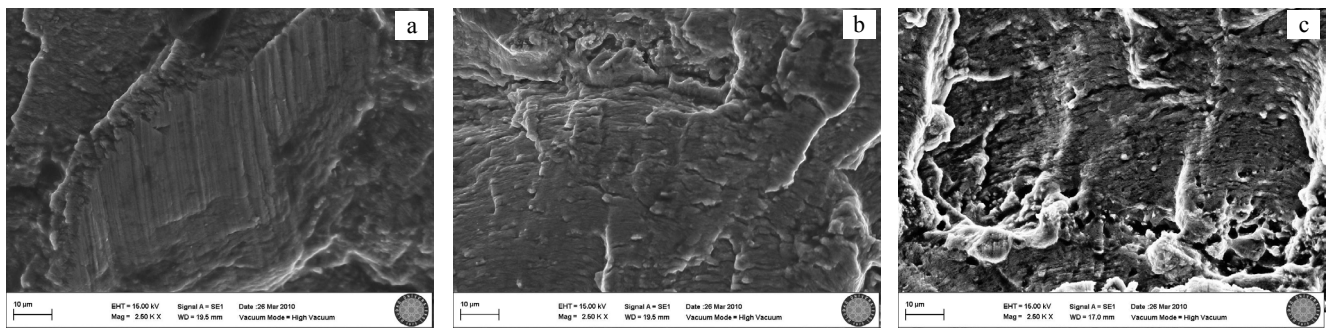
SEM images of fatigue fracture surfaces of FS welded joints
